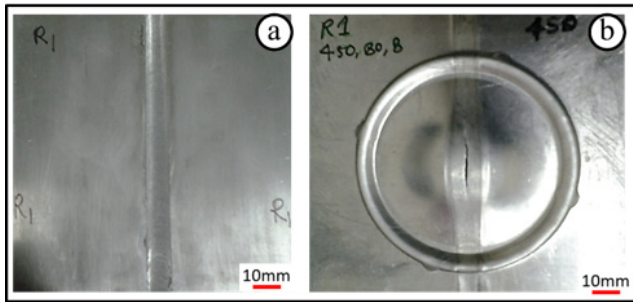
LDH tests specimen; (a) before testing and (b) after testing (separation of the weld line observed during stretch forming)
